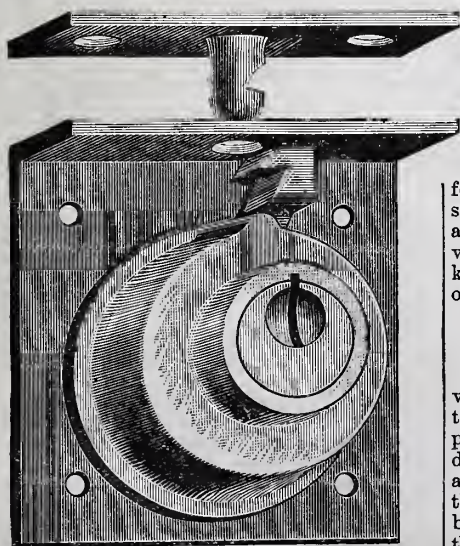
Chest Lock Made by the D. K. Miller Lock Co., Philadelphia.
